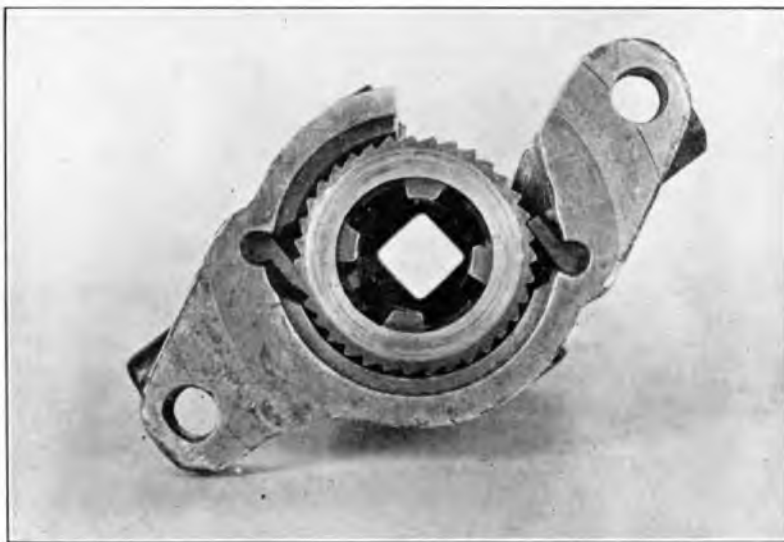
RACK WHEEL AND DRILL CHUCK.
